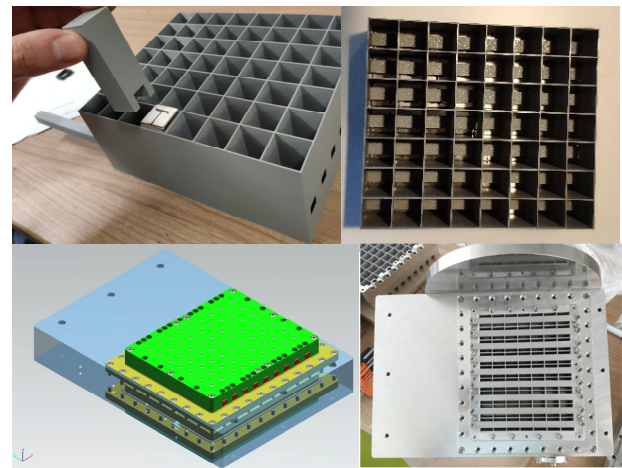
(top) test assembly of the magnet array with 3D printed plastic structure. (bottom) CAD design and image of the final assembly including a Fe shielding plate at the entrance and a 15 cm beam dump out of Al.
